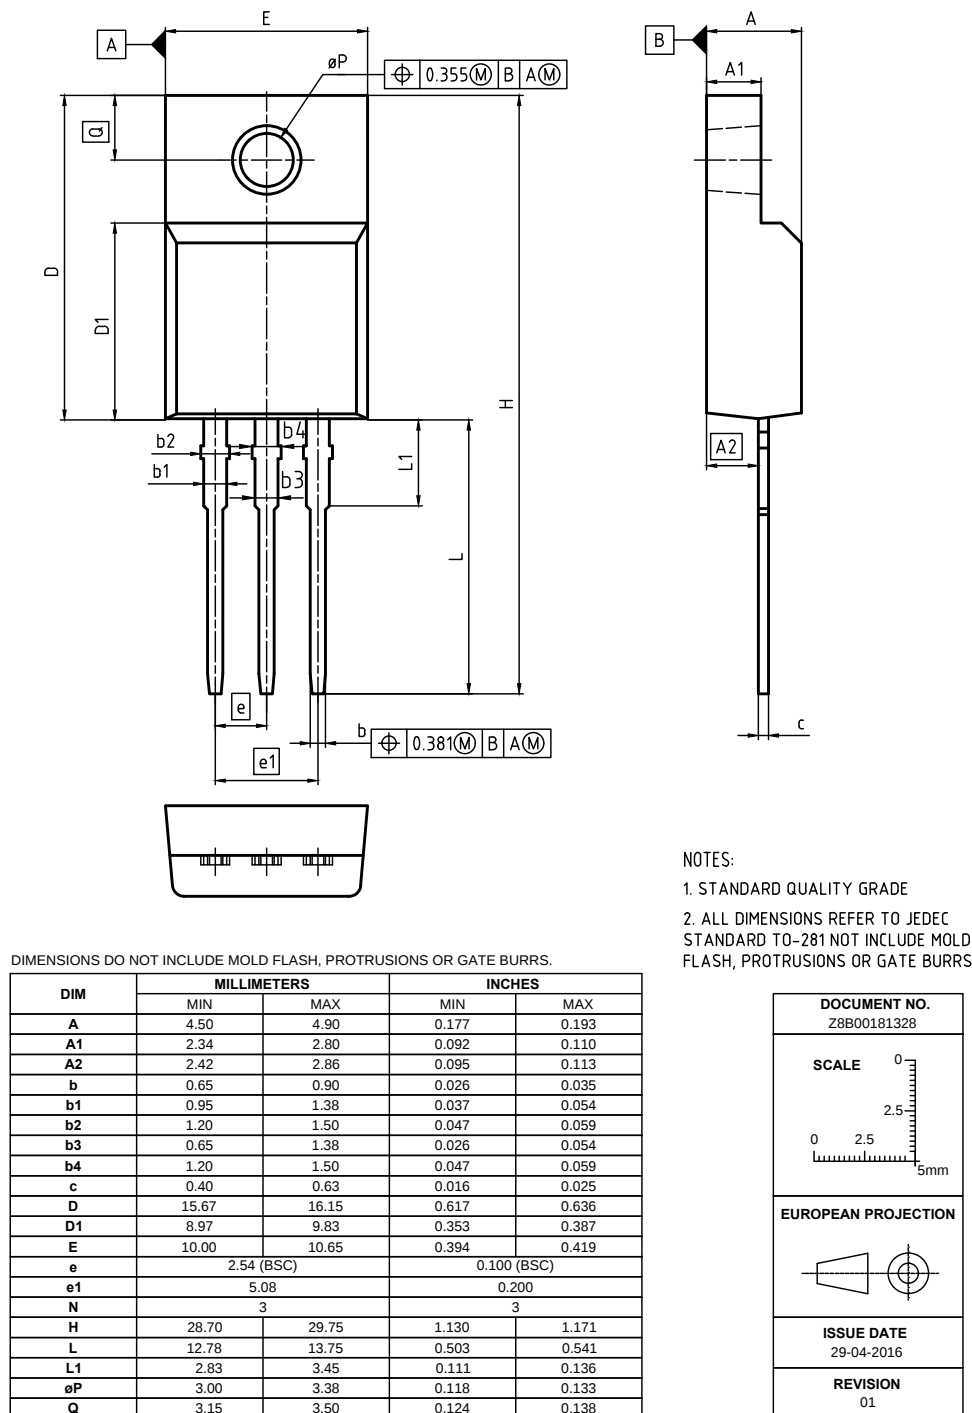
Outline PG-TO 220 FullPAK, dimensions in mm/inches
